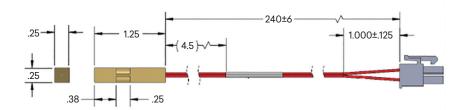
SENSOR IN MACHINED BRASS HOUSING
